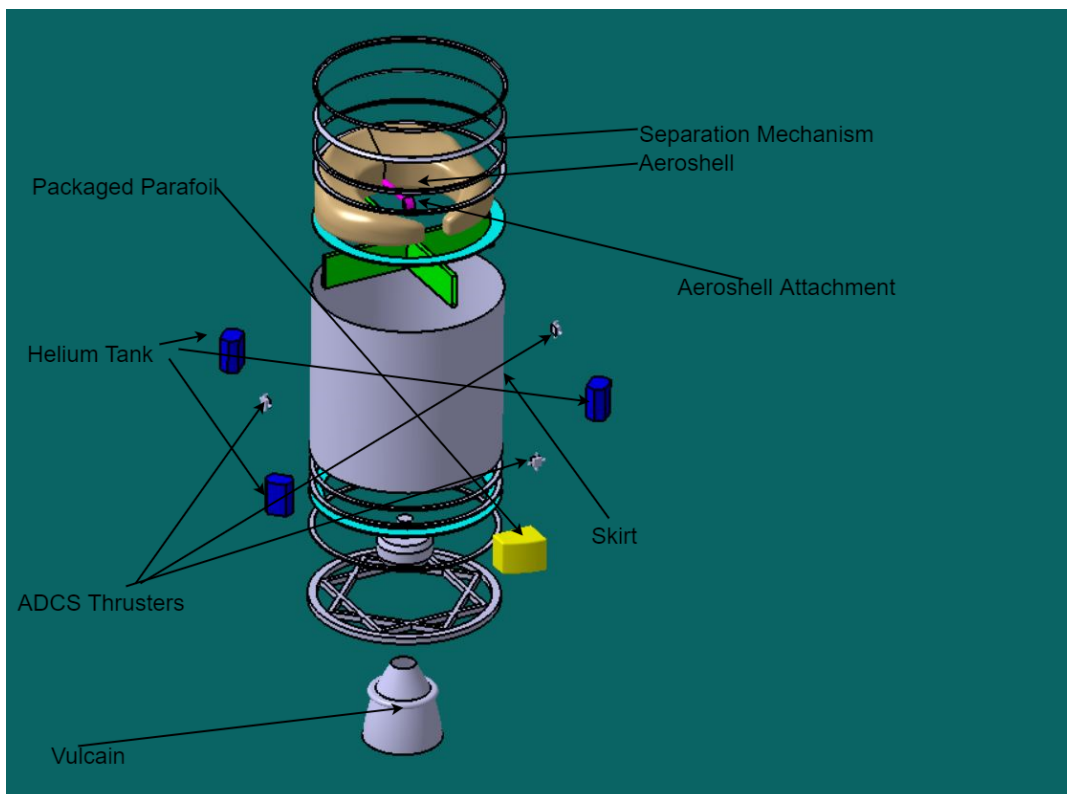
An exploded view of the design during pre-separation indicating important components
